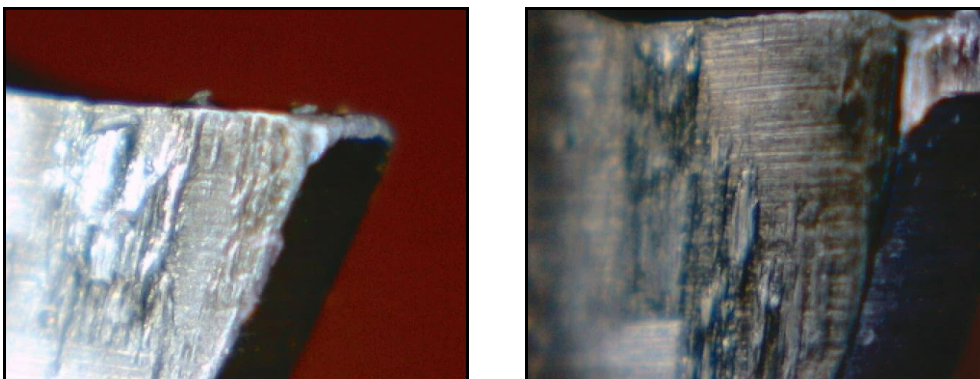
Experimental results - BUE and flank welding of work piece material to the flanks of the blade from overheating in the cutting zone and flank zones of the blade slotting process.
